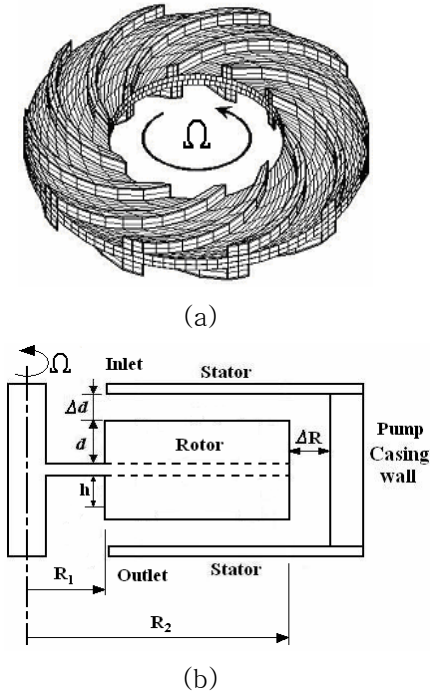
Geometrical shape of a rotor: (a) rotor configuration, (b) side view.
